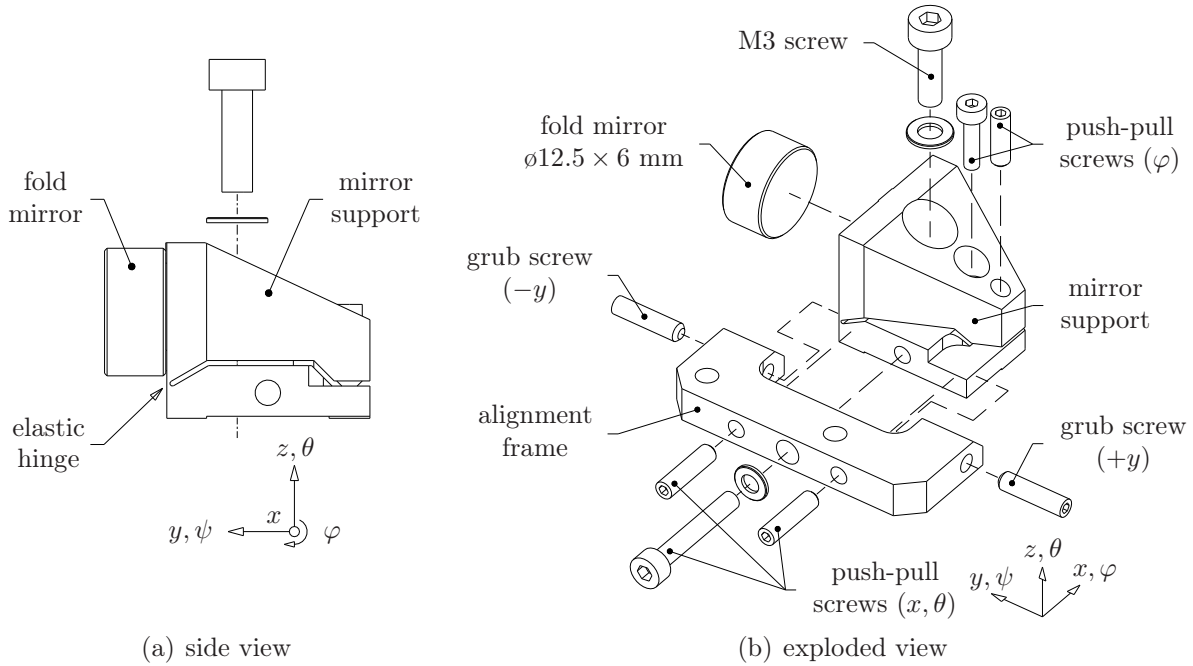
/ Side view and an exploded view of the fold mirror assembly. The mirror's φ orientation is adjusted with push-pull screws on the mirror support. The alignment frame is temporarily installed on the instrument base and simplifies the fold mirror alignment in x, y and θ .
